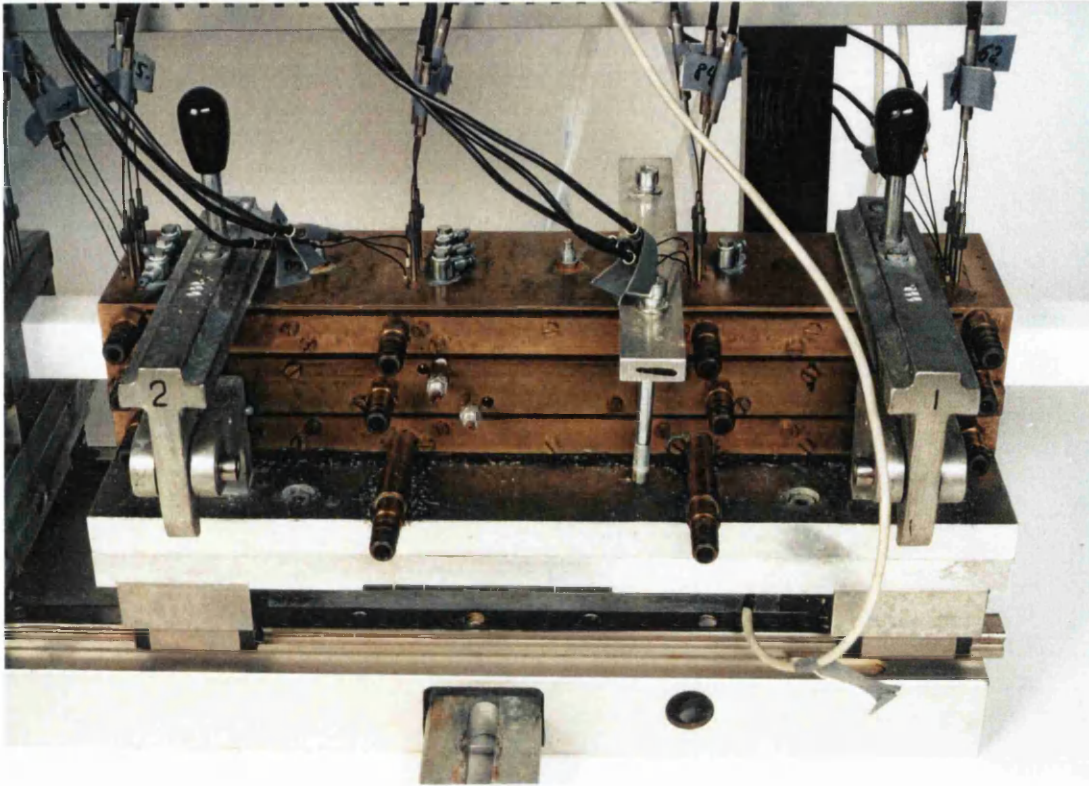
Mounted calibrator 1 with fitted thermocouples
